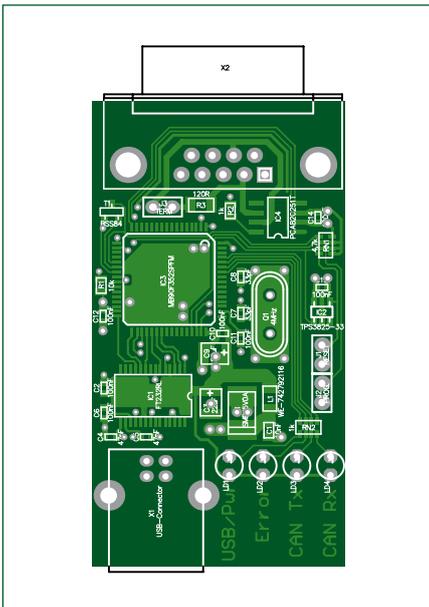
PCB component layout as seen from above. The size of the PCB shows just how compact this project is.
